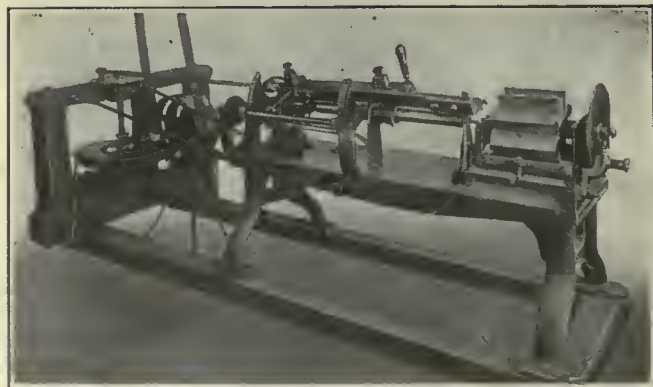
CRANK PLANER FOR PLANING ROTARY-PUMP BUCKETS, BUILT BY ALVIN JENKS, PAWTUCKET, R. I., ABOUT 1833
